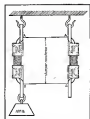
Jumper assembly of aluminum legs welded to No. 4 aluminum strand cable for a solder-free test.
